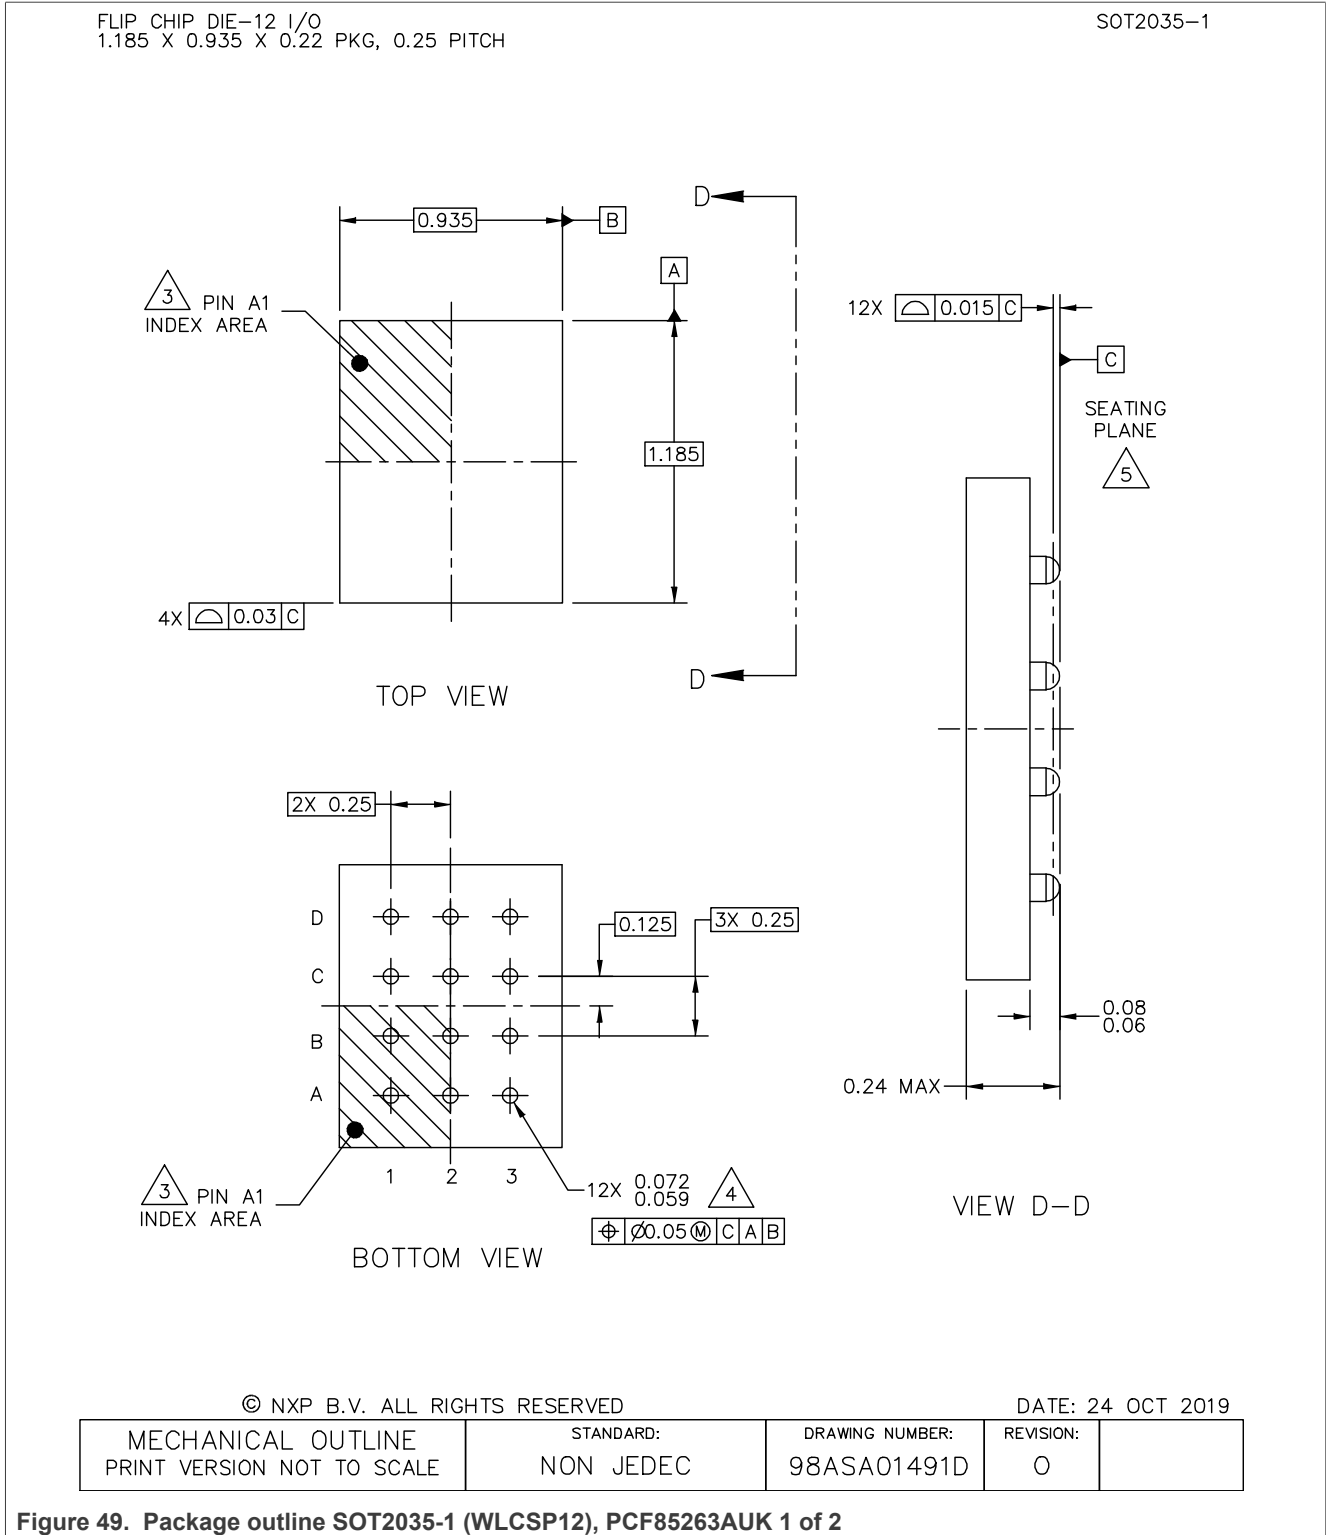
Package outline SOT2035-1 (WLCSP12), PCF85263AUK 1 of 2
